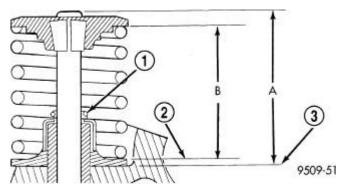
Spring Installed Height & Valve Tip To Spring Seat Dimensions Courtesy of CHRYSLER GROUP, LLC
